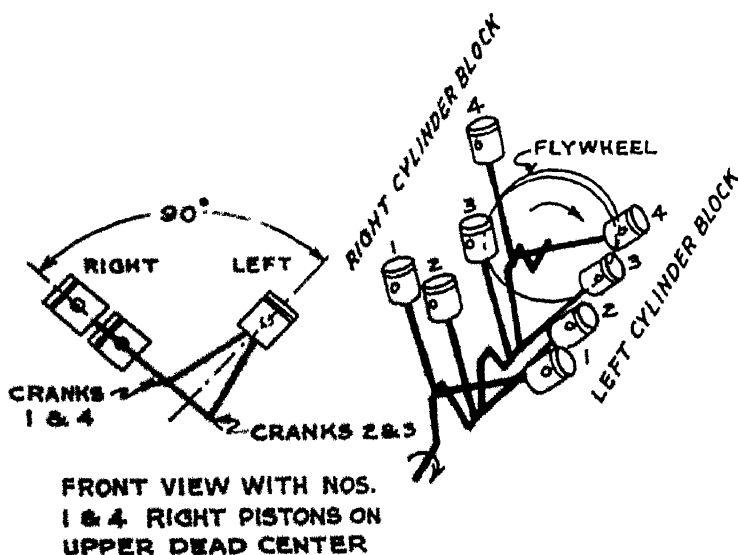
Arrangement of cranks, connecting rods, and pistons for eight-cylinder, 90 deg., V-type engine.
